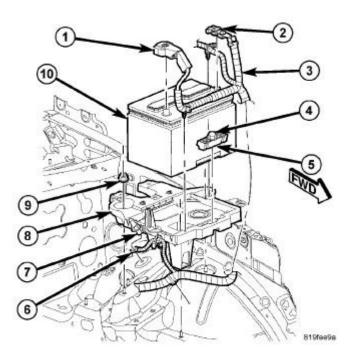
Battery Cables & Assembly Courtesy of CHRYSLER LLC
